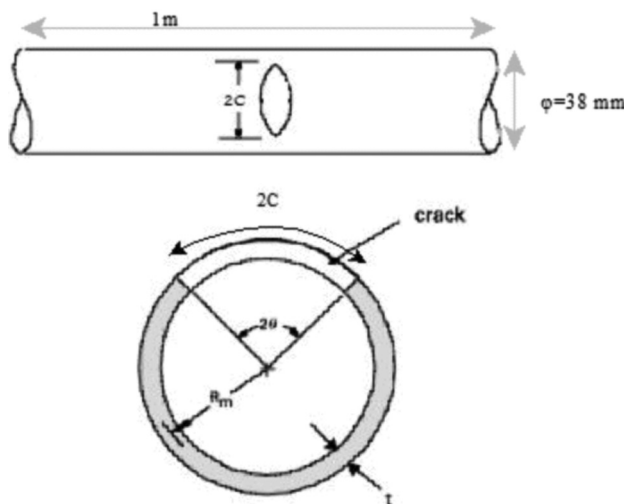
Geometry of a tube with a circumferential through wall crack
